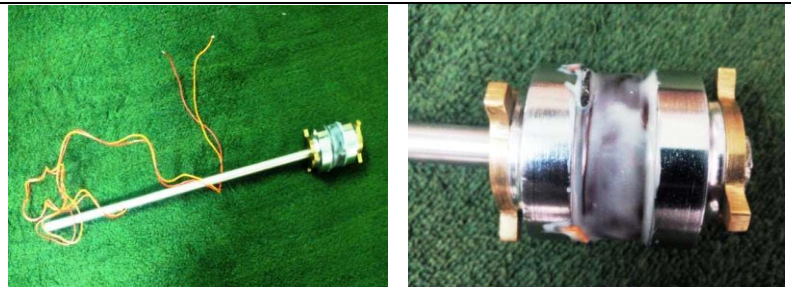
Piston and Piston Rod Shown with magnetic coil and guide rail
